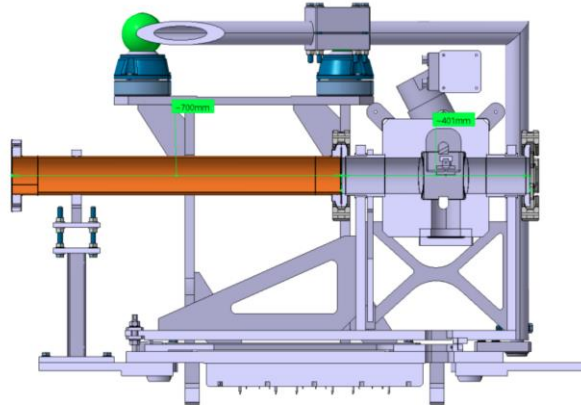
TCCS Goniometer drawing. The tank containing the crystal is visible on the right hand side. Drawing ID ST172900.
